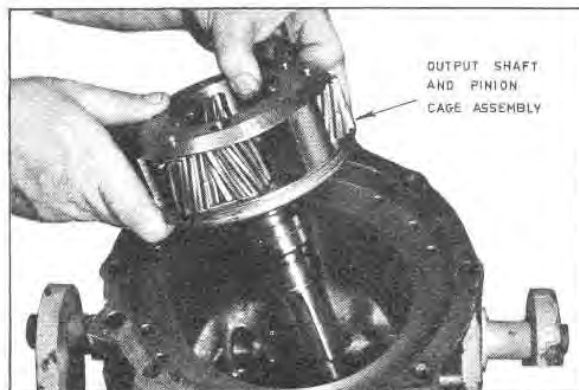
Installing Pinion Cage and Output Shaft Assembly
